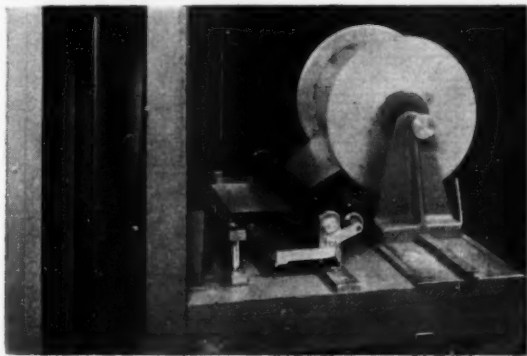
Loading ledge of machine, with automatic run-out brake and audible alarm.
